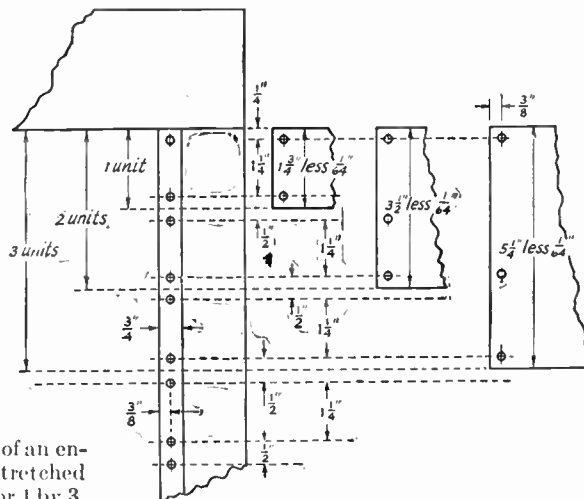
Detail sketch showing proper drilling for standard rack and panels. As shown for the 3½- and 5½-inch panels, only sufficient holes are drilled in the panel to provide the necessary strength. When the panels are drilled as shown, they may be moved up and down in steps of 1¾ inches and the holes will always match.
